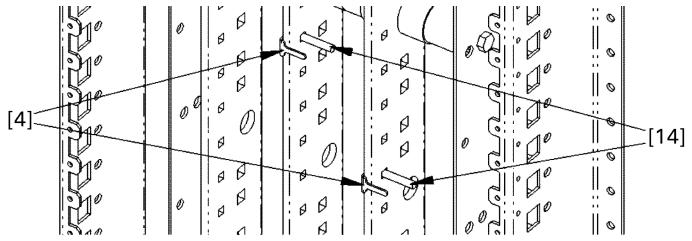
Installing carriage bolt assemblies on phases B and C, isometric view.
